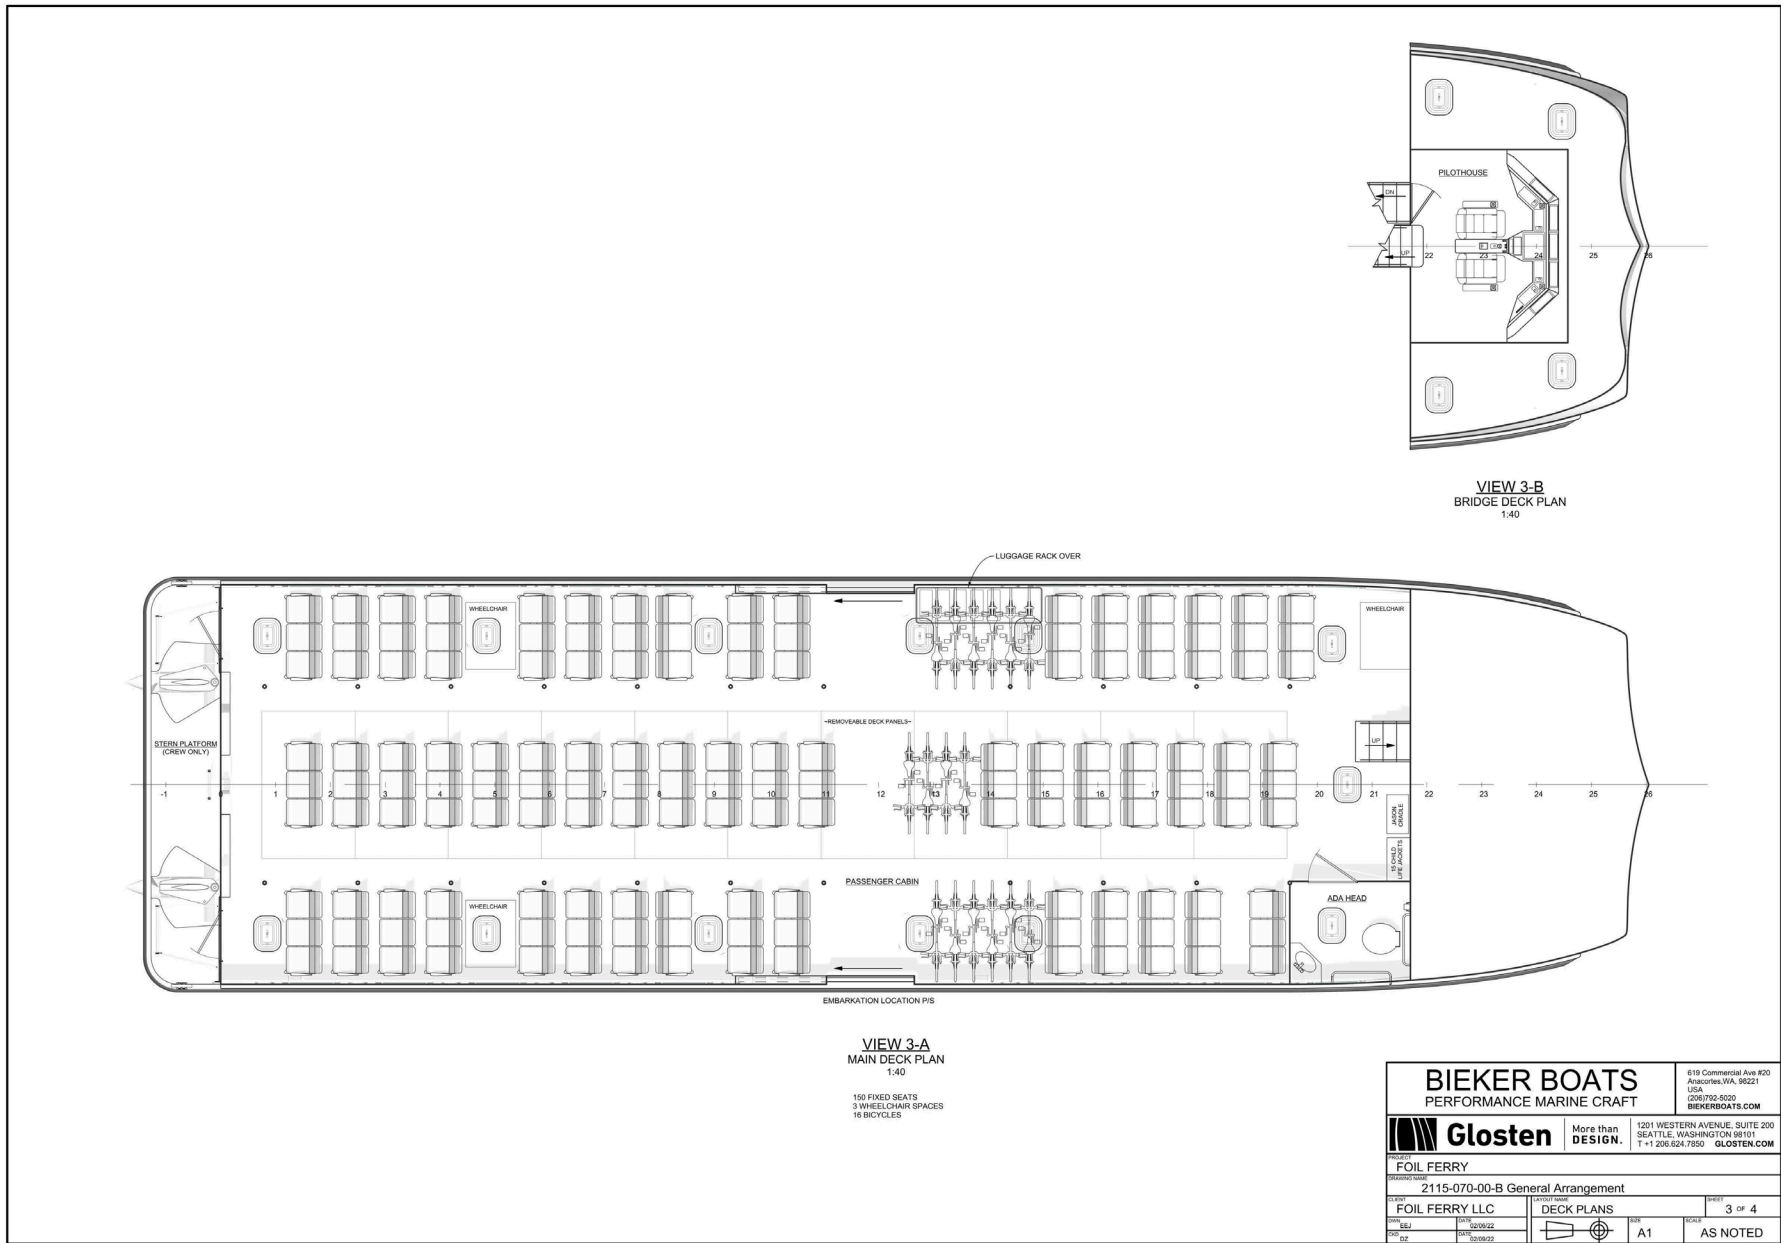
General Arrangement View 3-B and 3-A, bridge and main deck plans
